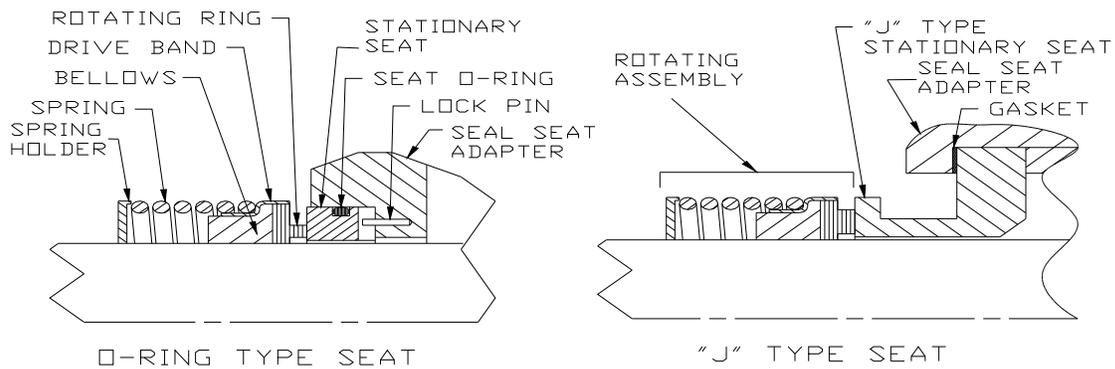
Mechanical Seal Drawing (Single Spring, Bellows Type)
